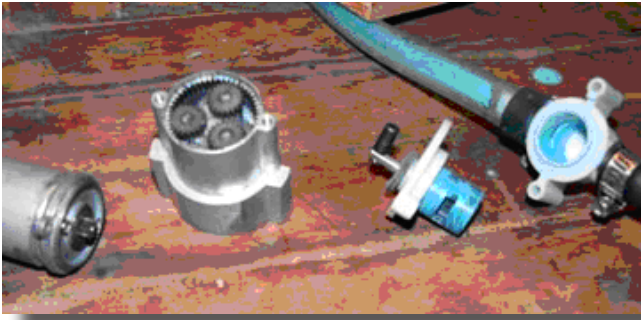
Motor, gear drive, impeller, and housing of pump tested.
